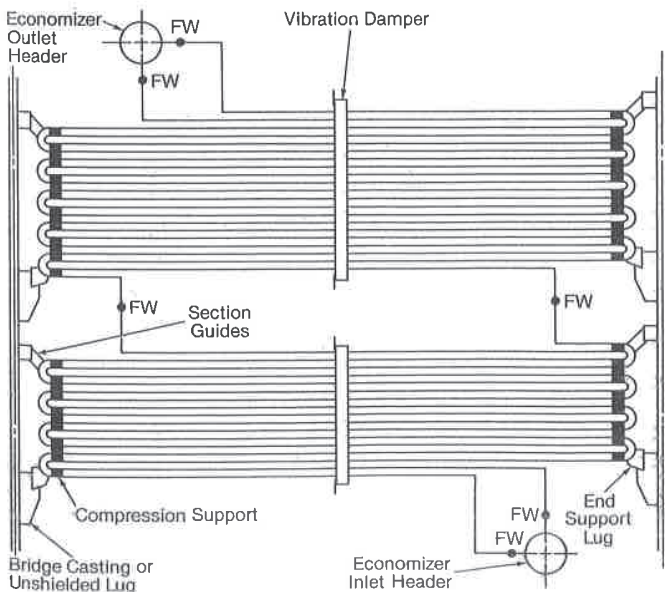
Economizer supports — sample waterwall support arrangement. (FW = field weld.)
